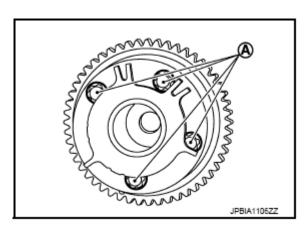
Identifying Camshaft Sprocket Mounting Bolts Courtesy of NISSAN NORTH AMERICA, INC.
